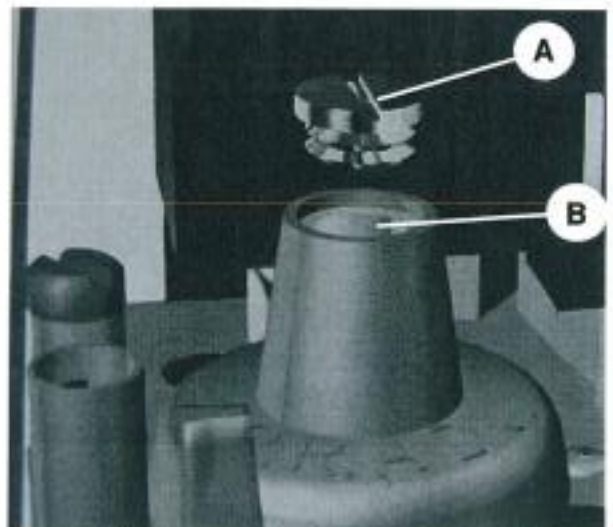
Adjusting screw nozzle pressure gas combination valve
